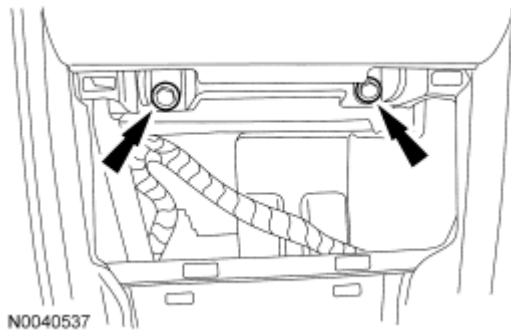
Locating Upper Center Instrument Panel Finish Panel Lower Screws
